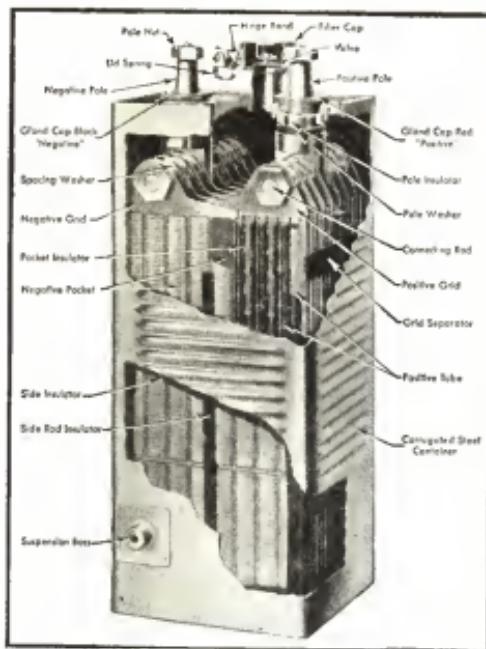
Cutaway View Showing Plate Assembly of an Edison Cell
